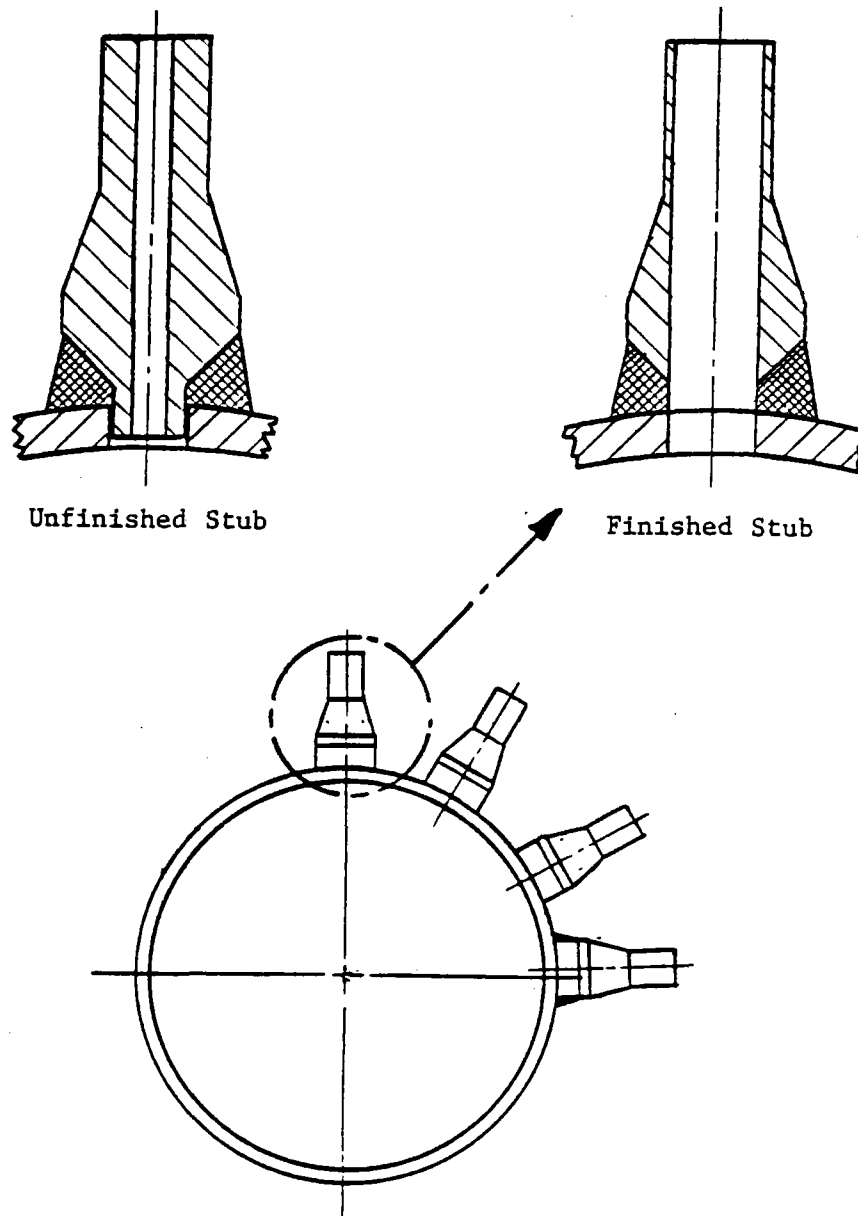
Selected Tube-To-Header Attachment Configuration
